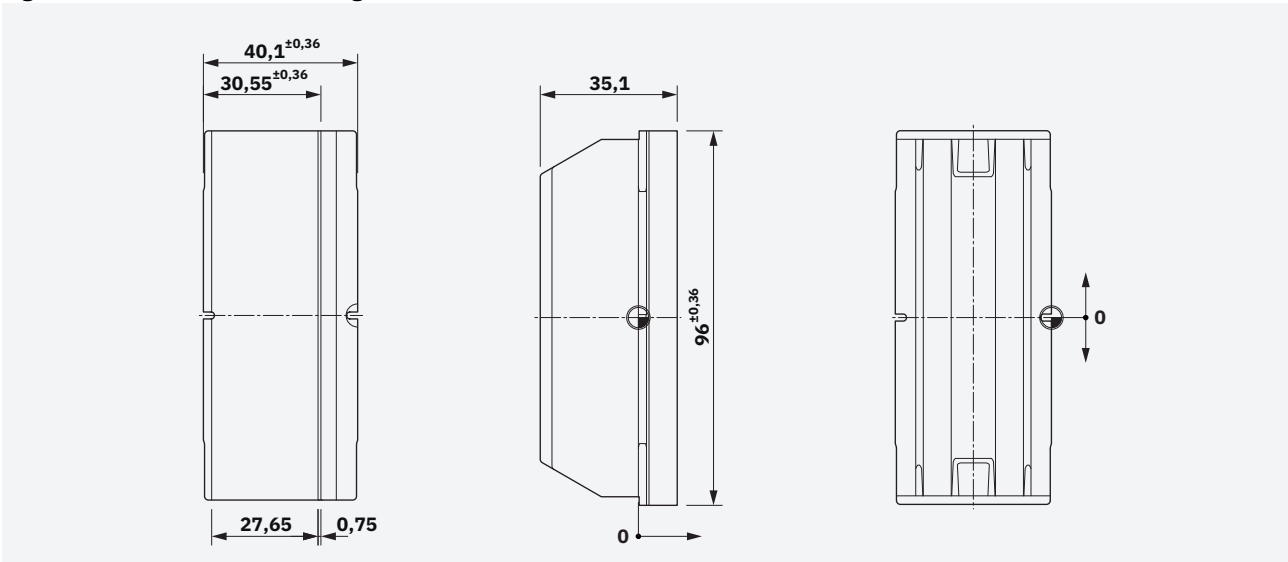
Dimensional drawing of UCS HS-SW 145-F AL
